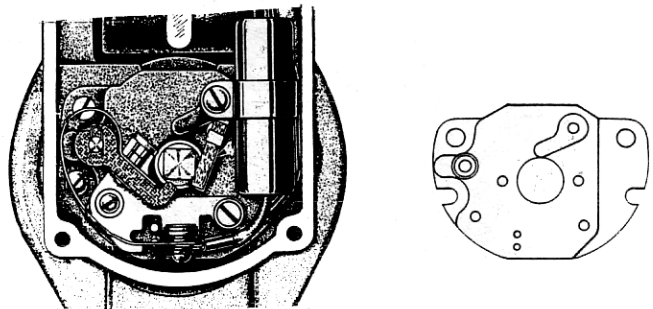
Bearing Support with and without Point Set, Condenser and Cam Wick
